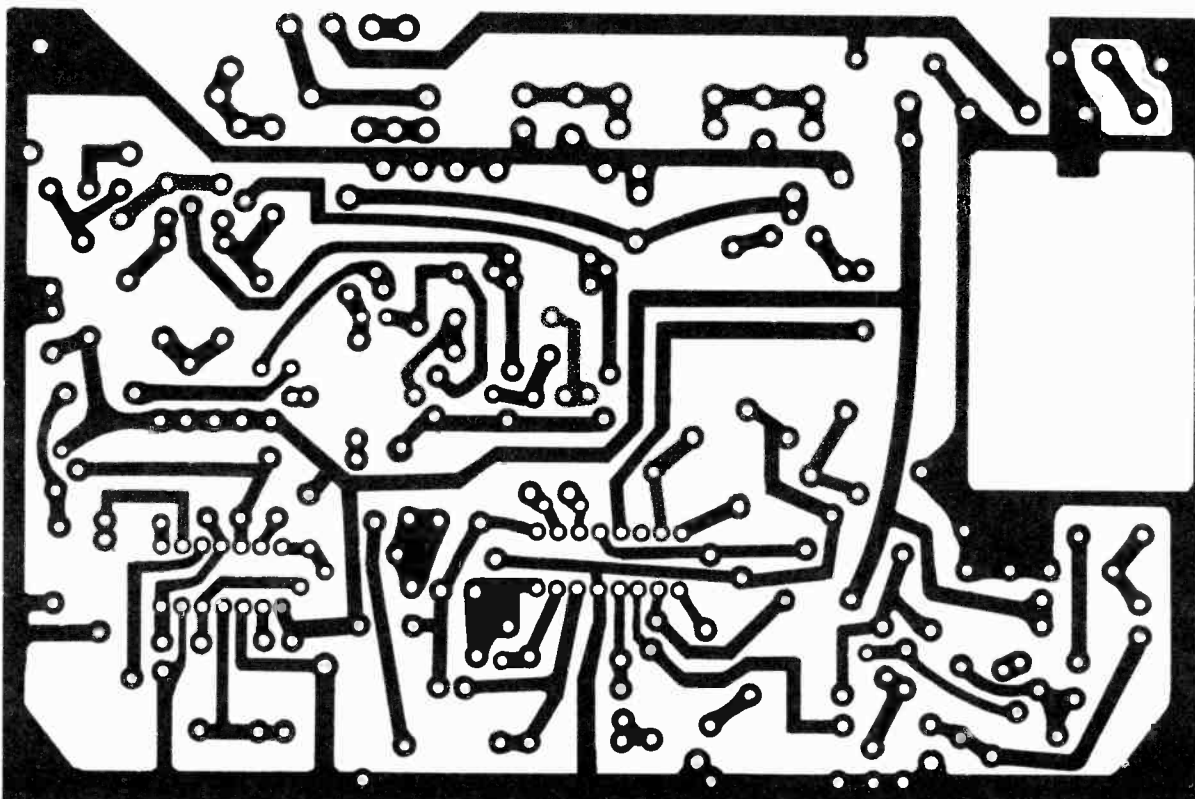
Copper side of printed board, actual size. Component side shown above.
